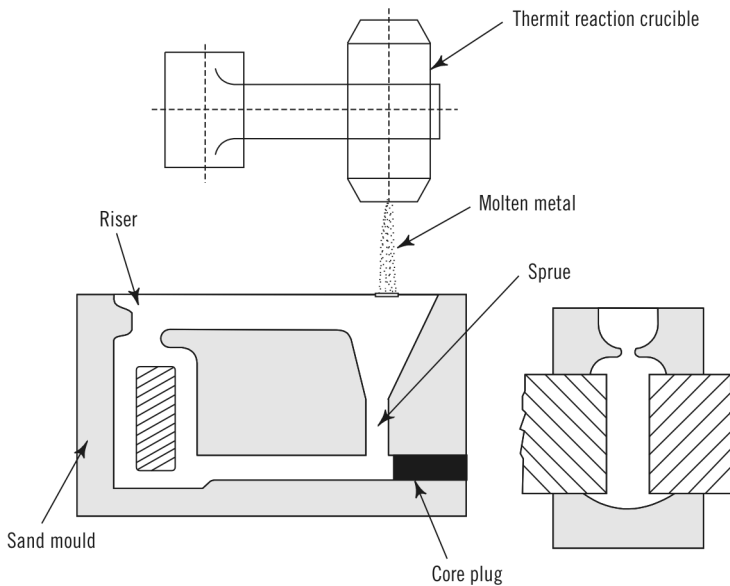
Arrangement of thermit welding for casting repair
